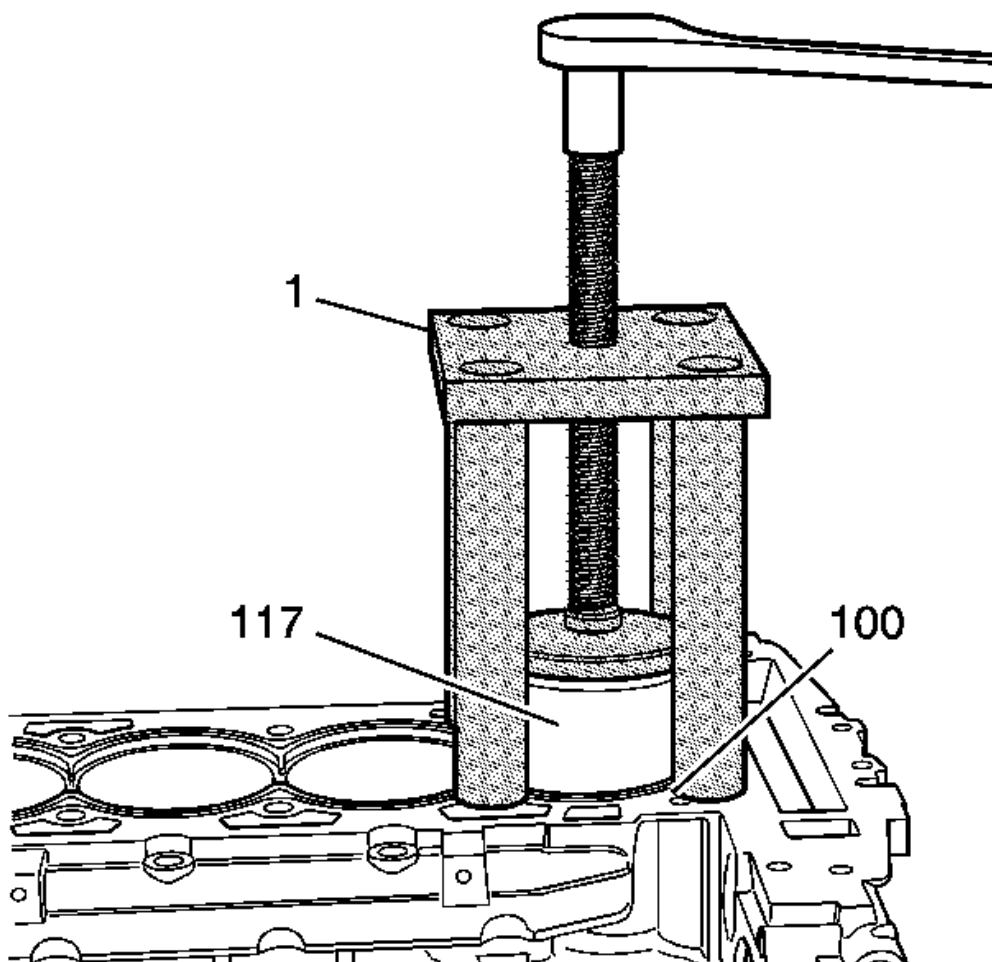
Installing Cylinder Bore Sleeve Into Engine Block Using Tool
